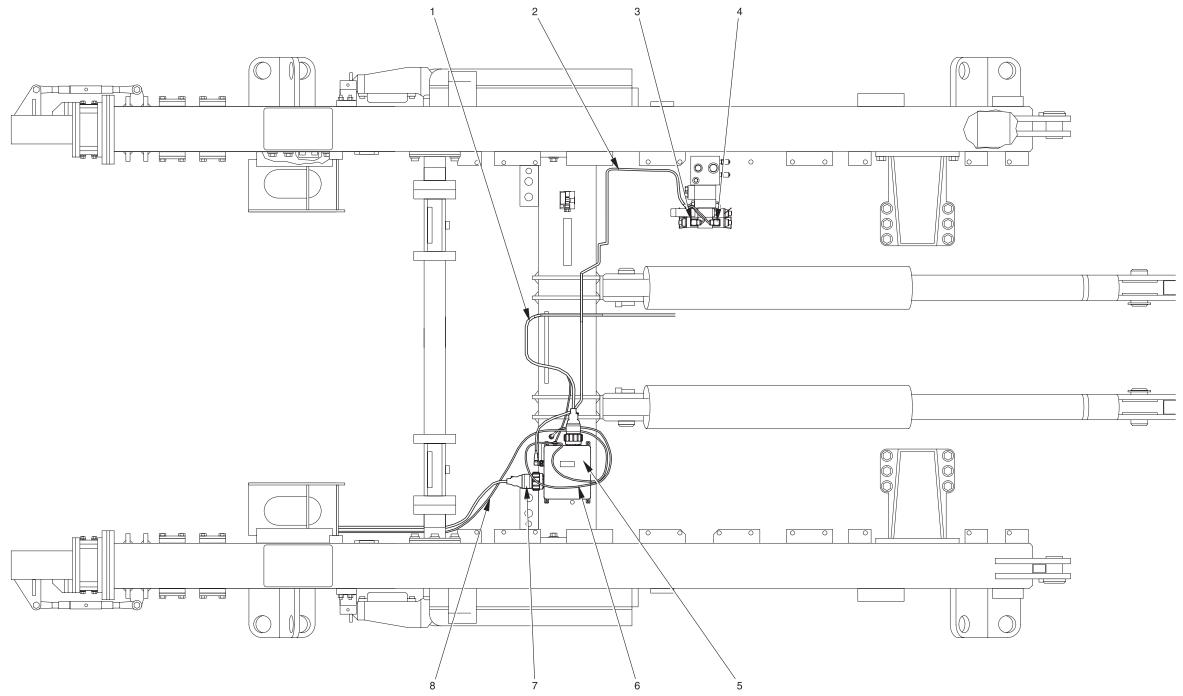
SLIDE FRAME ELECTRIC ASSEMBLY LOCATIONS
